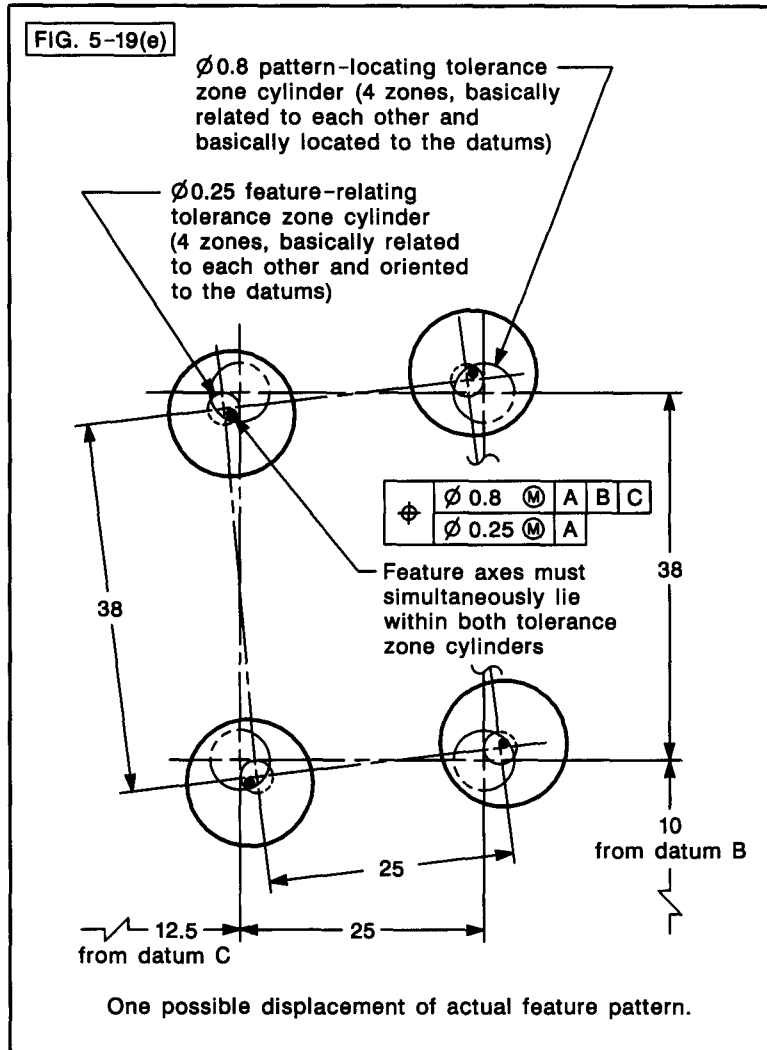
HOLE PATTERNS LOCATED BY COMPOSITE POSITIONAL TOLERANCING (CONT'D)
